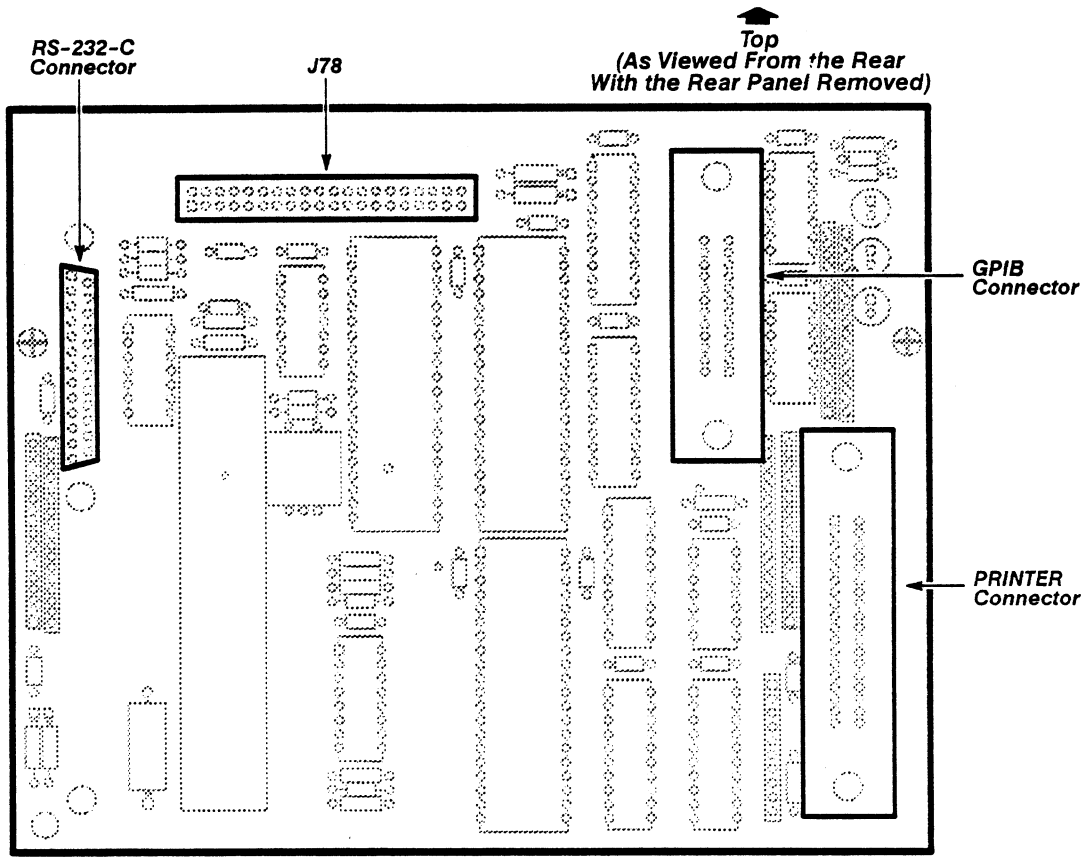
Removing/Replacing the A12 Rear Panel Assembly
